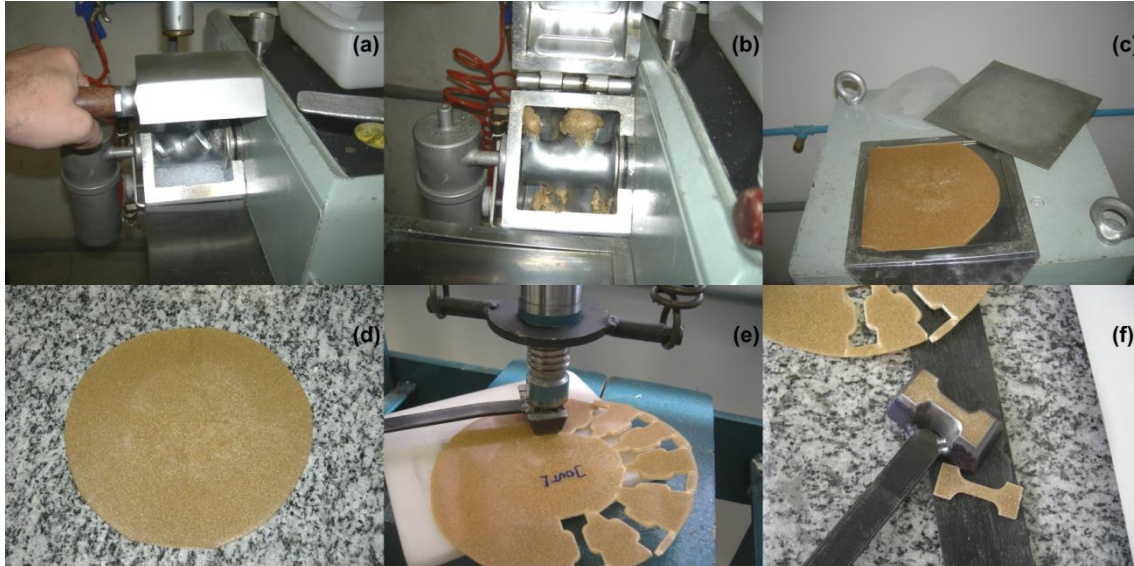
Picture illustrating the composite fabrication procedure. (a) pellets inside the mixer; (b) melted mass after mixing; (c) and (d) disc formed by compression molding and; (e) and (f) cutting of the tensile test specimens with cutting tool and press.
